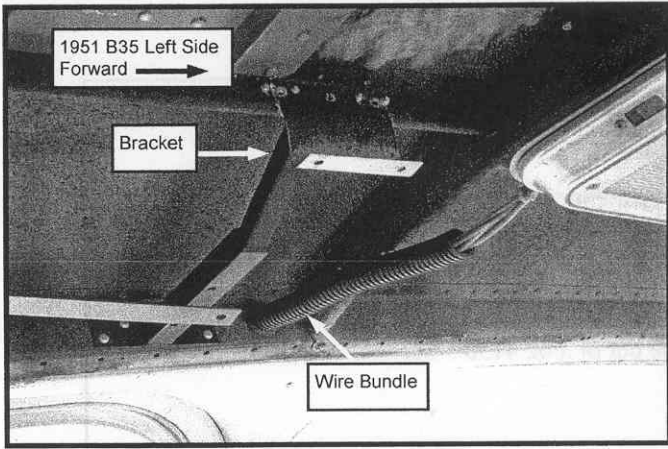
Headliner Bracket 1 Piece Headliner Installation Item No. 1
